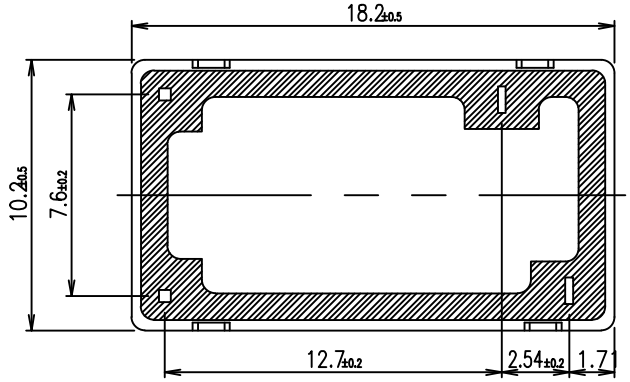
FIGURE FOR PRINTED CIRCUIT BOARD PROCESSING (BOTTOM VIEW)
